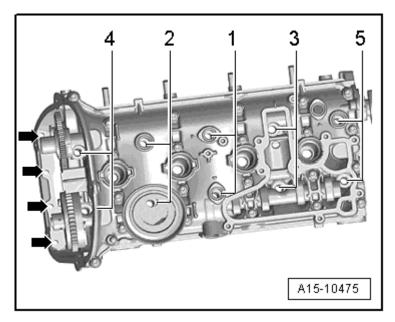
Identifying Cylinder Head - Tightening Sequence
